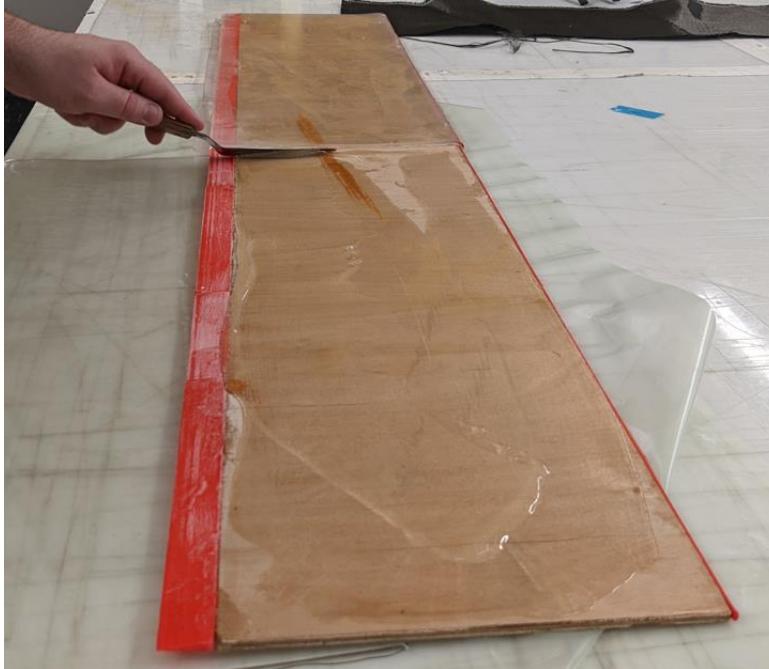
Binding mixture applied on left side of flat-plate surface
